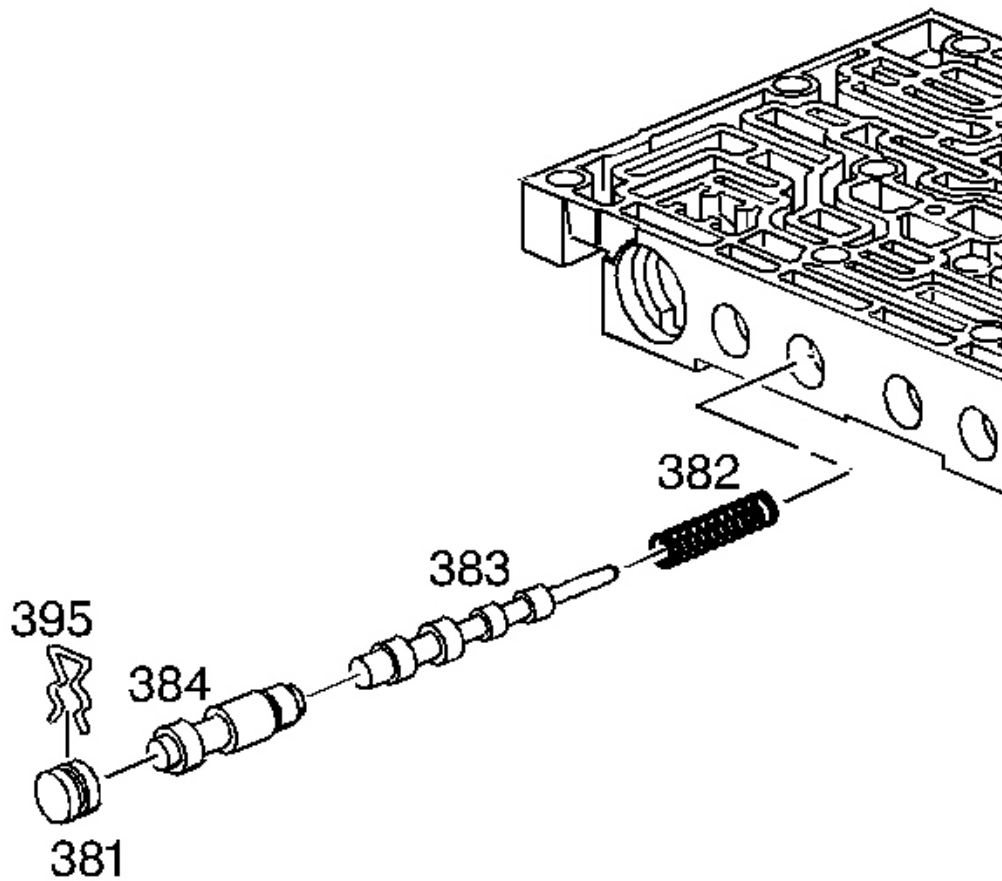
View Of 4-3 Sequence Valve & 3-4 Relay Valve
